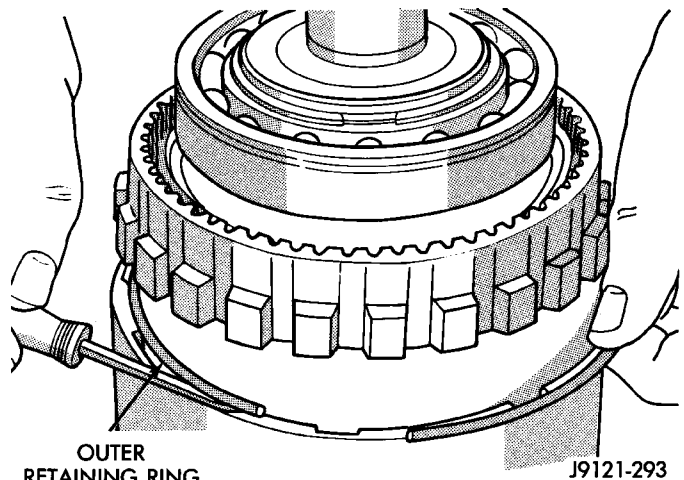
Clutch Drum Outer Retaining Ring Removal
